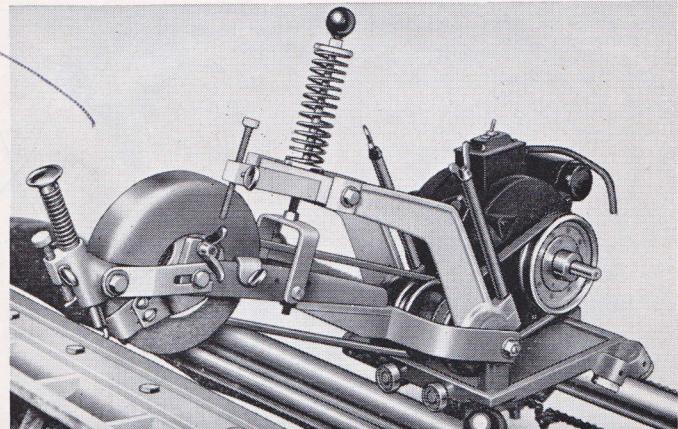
This is the grinding head of the Peerless with the hook engaged under the bed knife and the grinding wheel in contact with a reel blade.
